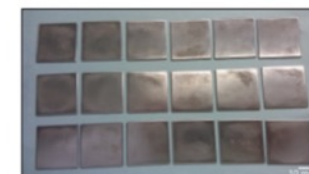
KUCA fuel coupons with an Al cladding welded and marked by laser
